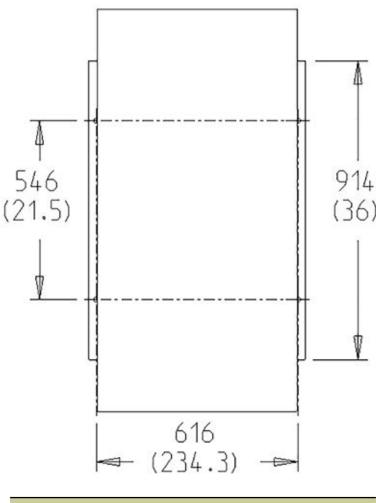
Seismic PARC4 Mounting Hole Locations
